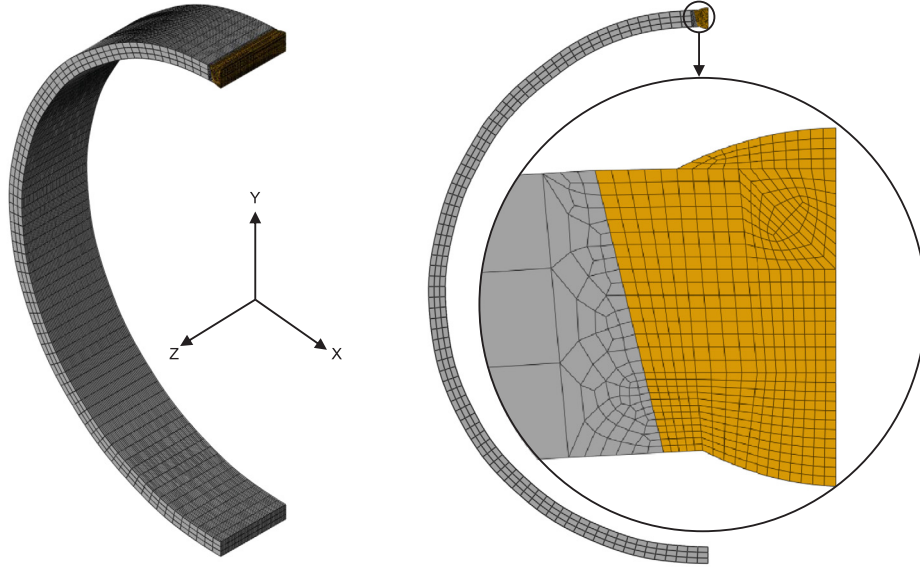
Finite element mesh of the auxiliary three-dimensional welding model.
